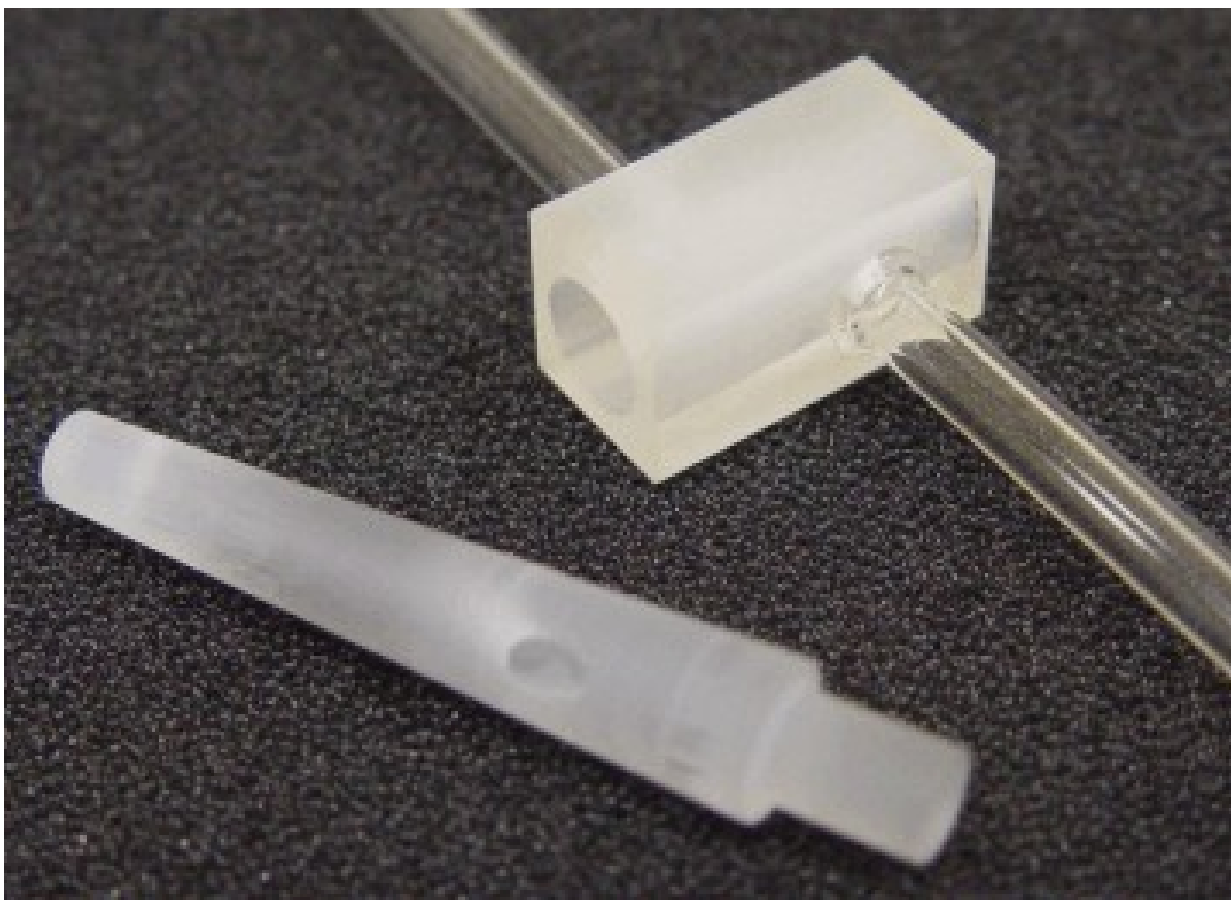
Stopcock plug, barrel and tubes. Apart from the inlet and outlet tubes, the photo shows the stopcock plug (left) and barrel (right) as purchased. Additional preparations are required for the stopcock to be functional, to meet cradle specifications, and to sustain a high vacuum (< 0.1 Pa) over weeks at a time. Modifications performed at NIST include: lapping sealing surfaces, attaching tubes (as shown), grinding back the plug shoulder diameter (right side), sealing a handle (not shown), and bending tubes to fit the GPC/cradle configuration.
